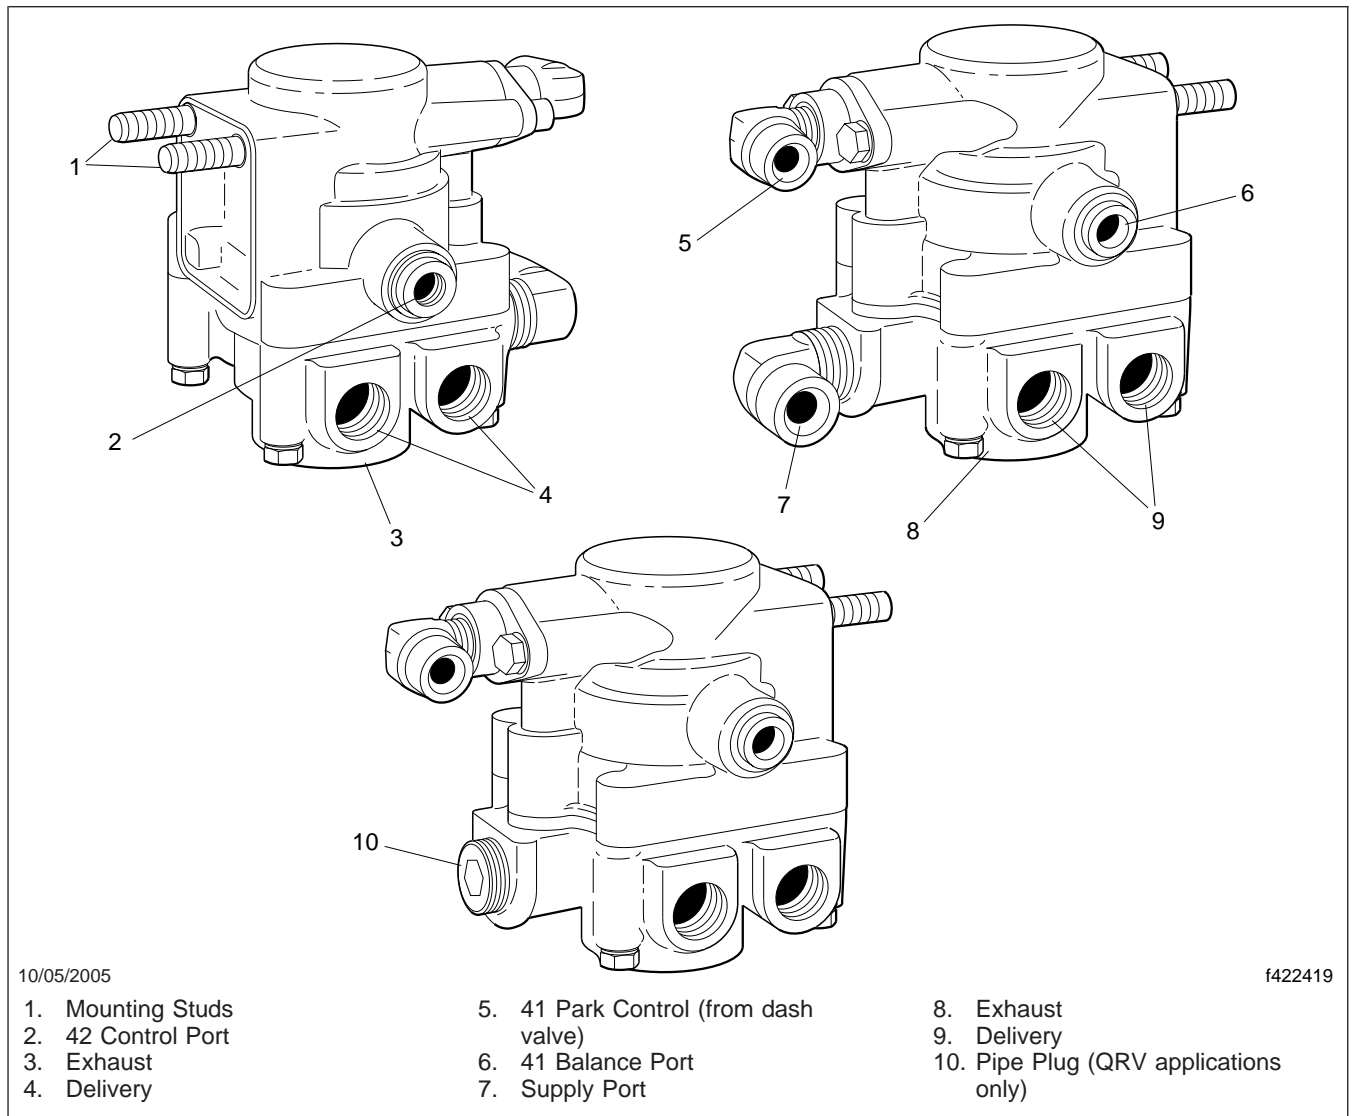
, SR-7 Spring Brake Modulating Valve (exterior views)
